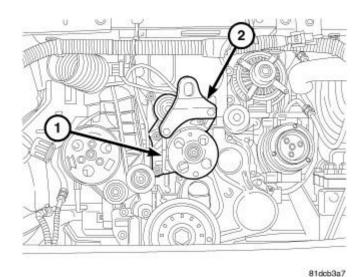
Accessory Pulley & Engine Lifting Bracket Courtesy of CHRYSLER LLC
